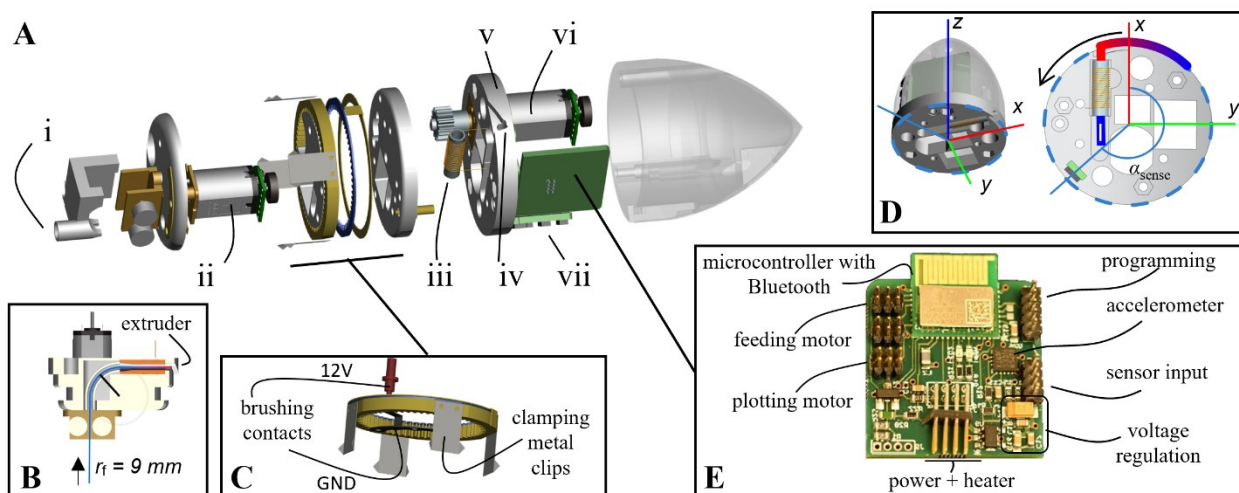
FiloBot robotic head. (A) Exploded-view drawing of the FiloBot robotic head with: (i) feeding channel, (ii) feeding motor, (iii) heater, (iv) extruder, (v) plotting disk, (vi) plotting motor, and (vii) sensors board. (B) The internal section of the feeding channel showing the filament path. (C) The internal gear adapter anchors to the body structure through the clamping metal clips. In this way, it provides a pivot around which the growing mechanism rotates and, at the same time, implements an integrated slip ring for power transmission through brushing contacts. (D) Robot tip with its coordinate system, sensor position (at $\alpha_{\text{sense}} = 225^\circ$ from the x -axis) and the plotting direction (black arrow). The material enters the heater in a solid and cold state (blue color in the picture), exits hot and malleable (red color), and solidifies again once deposited (gradient towards blue). The x -axis is aligned with the material deposition point. (E) The prototyped control board with an integrated Bluetooth link.
